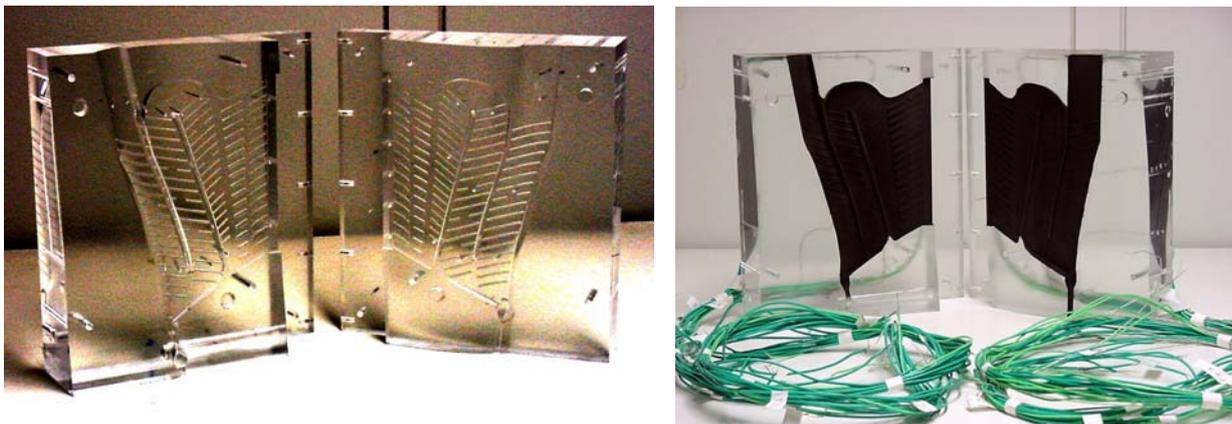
Full cooling scheme model parts for a gas turbine blade as machined from Perspex (left), coated and instrumented model parts (right).
